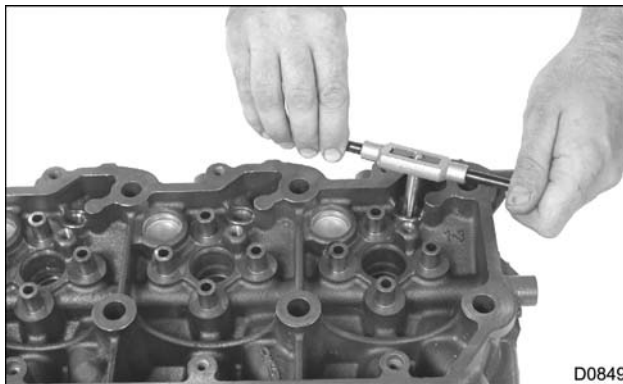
Glow Plug Sleeve Remover (thread tap) installation
